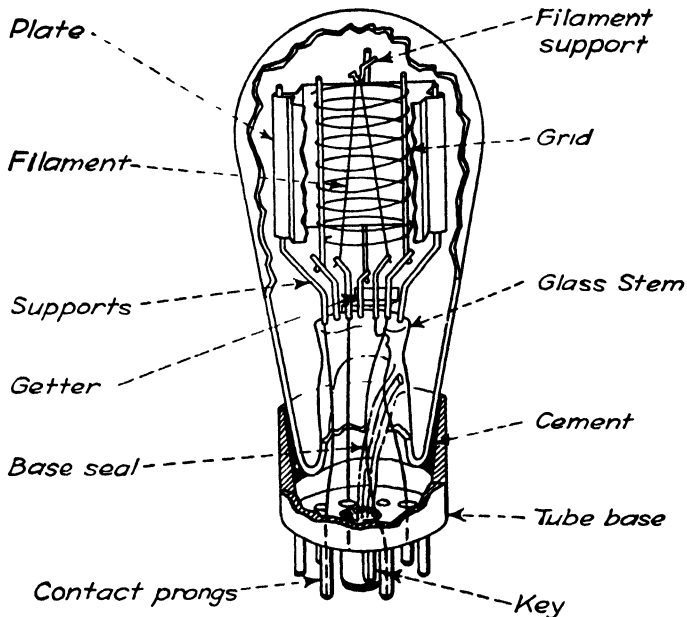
This is a sectional drawing of a triode tube showing all of its elements inside the cutaway plate. Note the construction and wiring inside the tube base.
